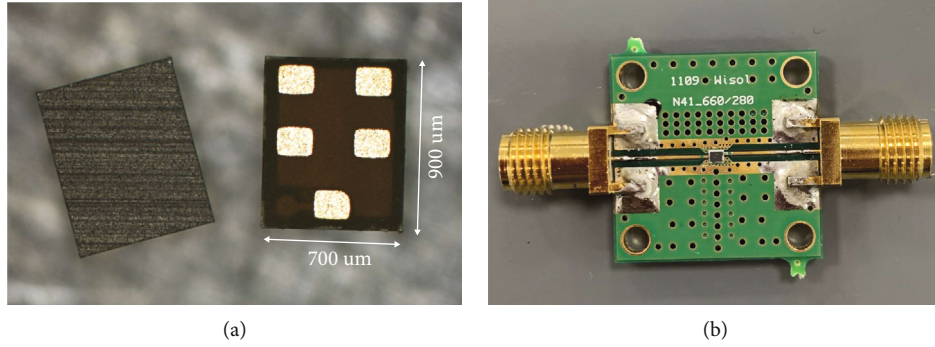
(a) Footprint and top view image of N41 filter chip. (b) Fabricated chip on the PCB using SMA connector.
